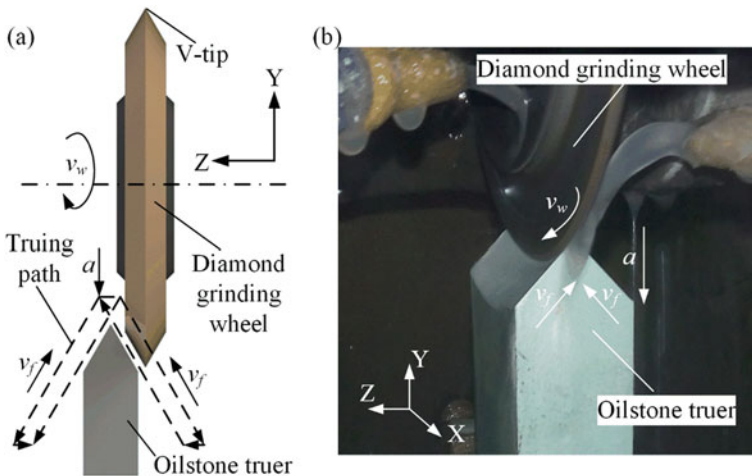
Photos and schematic diagram of grinding wheel using mechanical dressing
